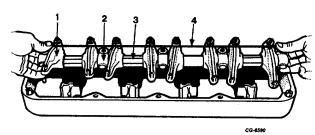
Method of Holding Rocker Arm Assembly Together for Installation
